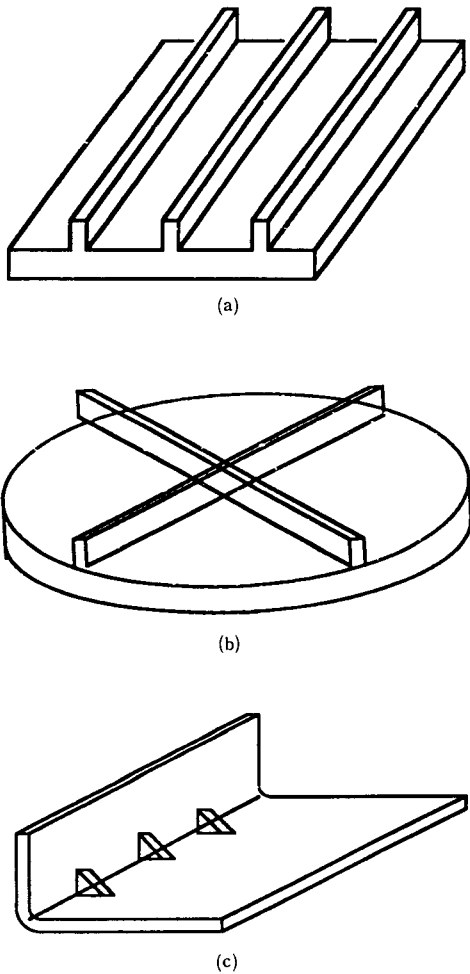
3 Representative types of ribs to be frequently used in general injection molded part design. (a) Rib on a rectangular plate, (b) Rib on a circular plate, and (c) Gusset rib on an edge
